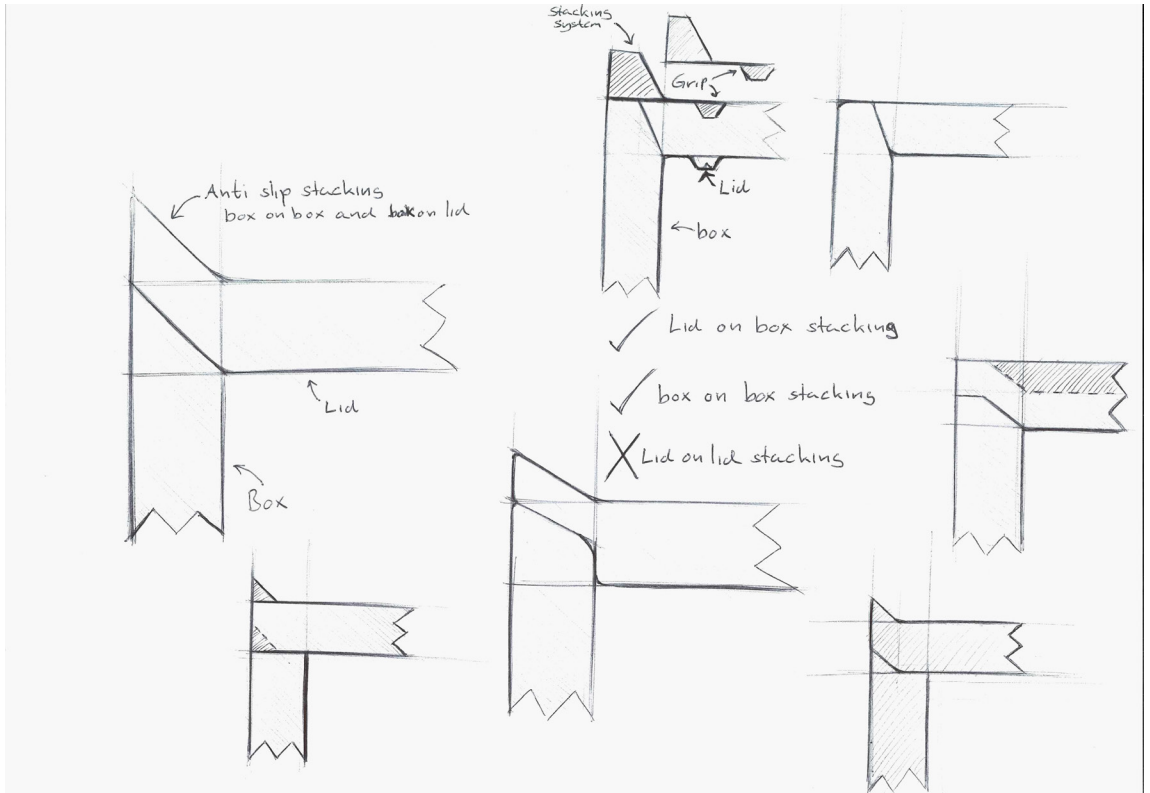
DRAWING SHEET 3- STACKING SYSTEM
